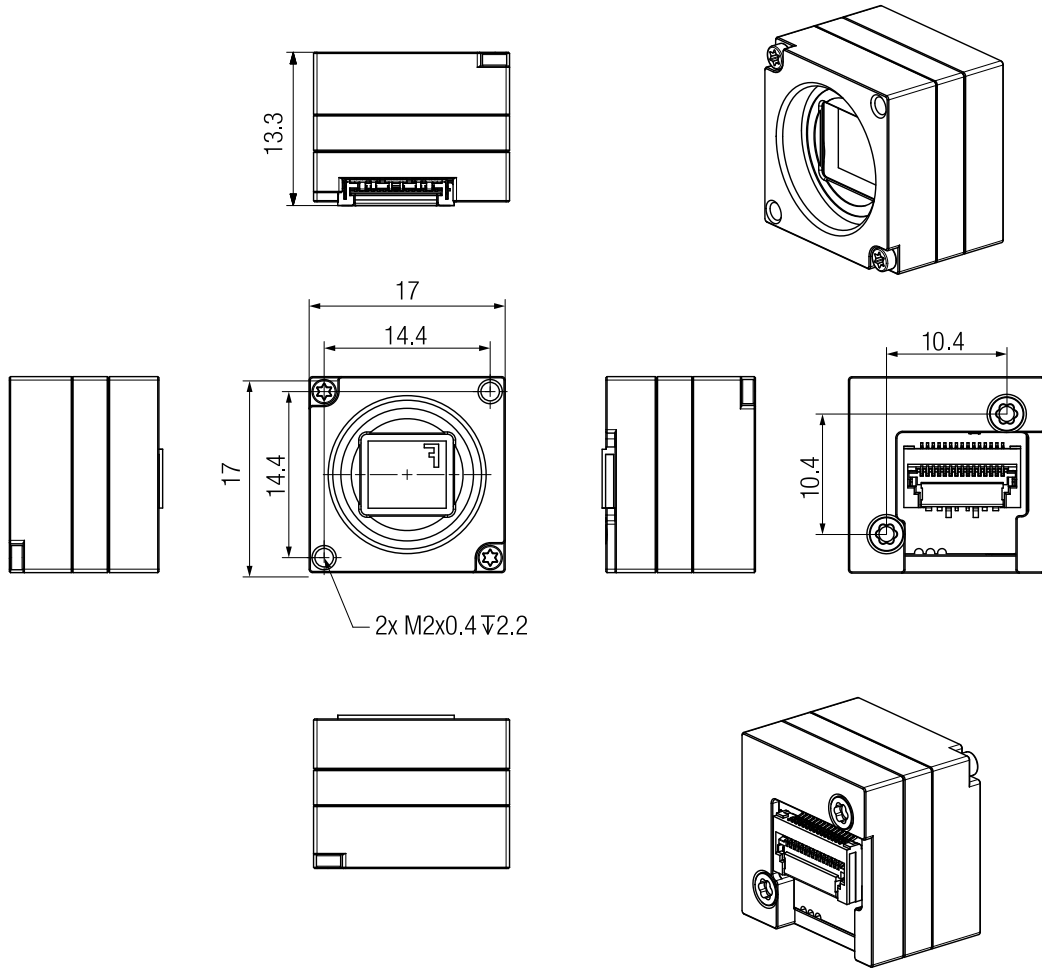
Dimensional drawing of MU051xR-SY with ADPT-MU-17x17-CX3-FL adapter
